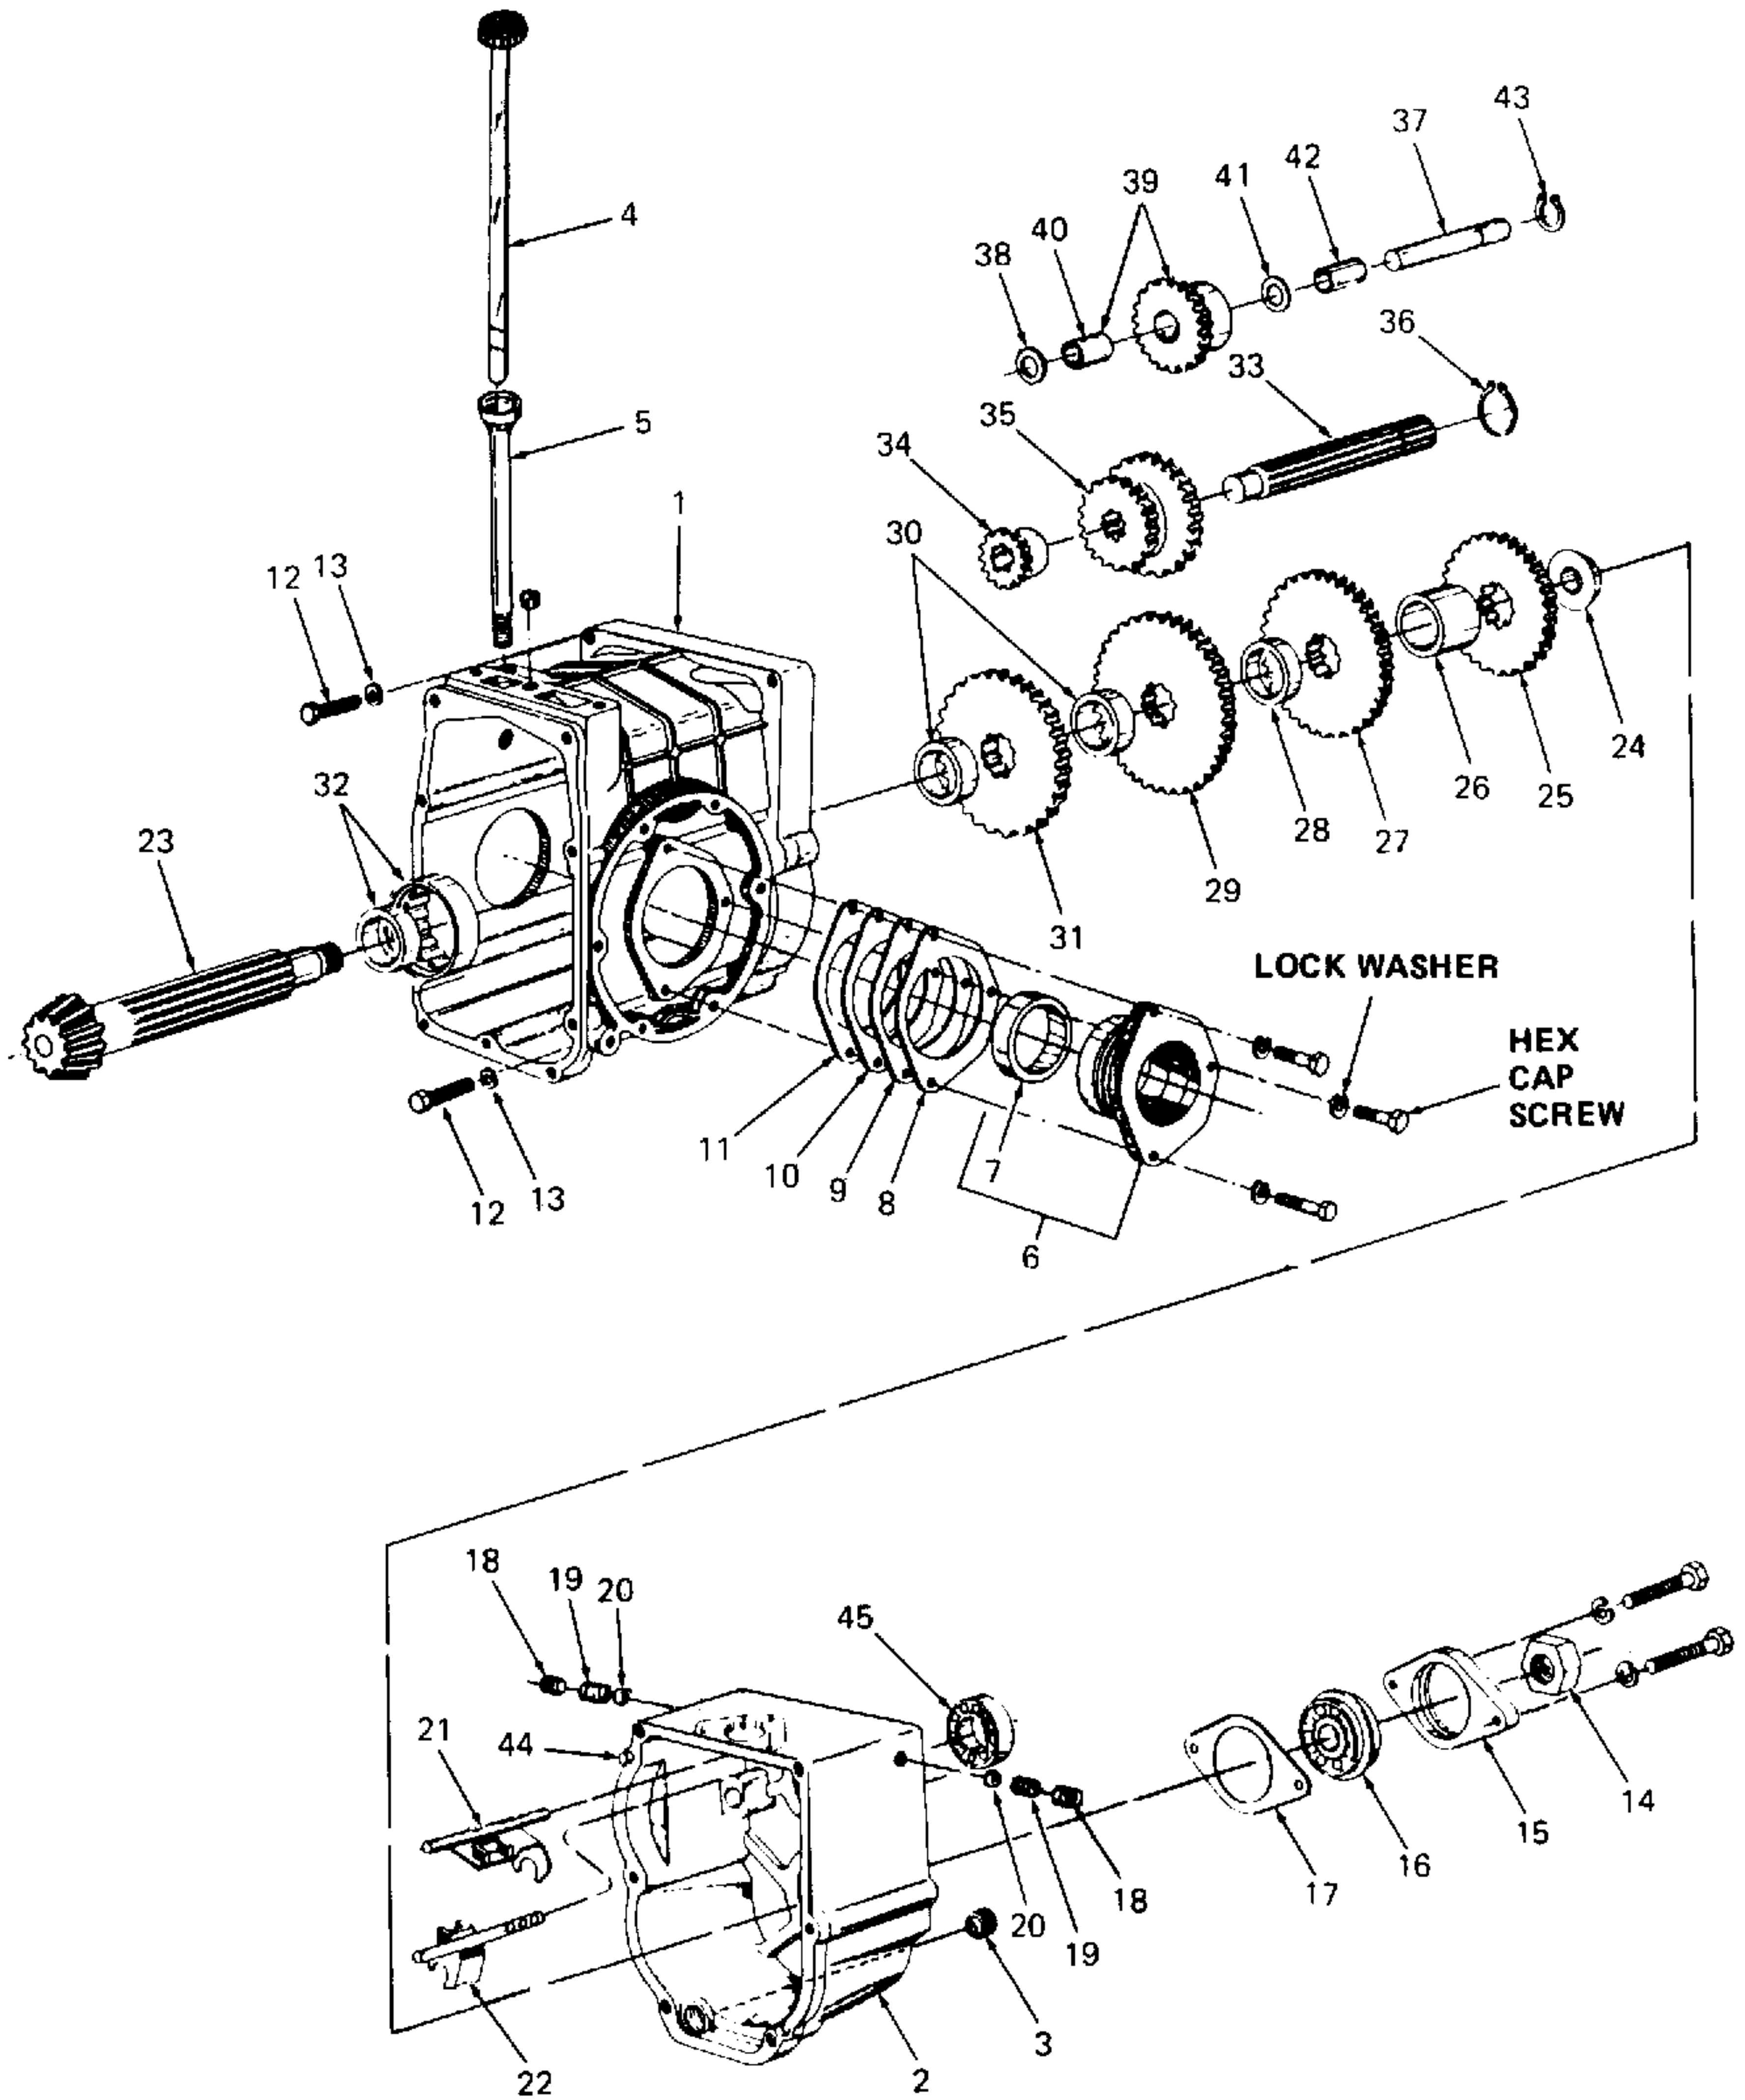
Transmission – Rear Housing and Gear Housing.
